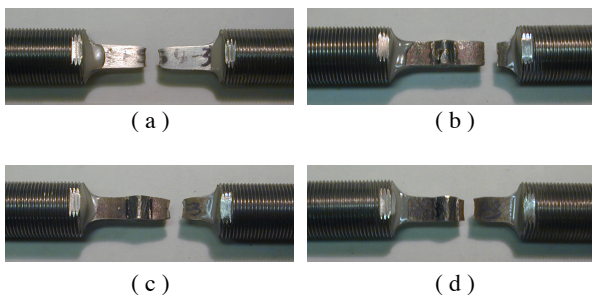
Fracture location observed in (a) all base metal specimens, (b) HR270, (c) HR590 and (d) HR780 welded joint specimens tested at dynamic rate.
